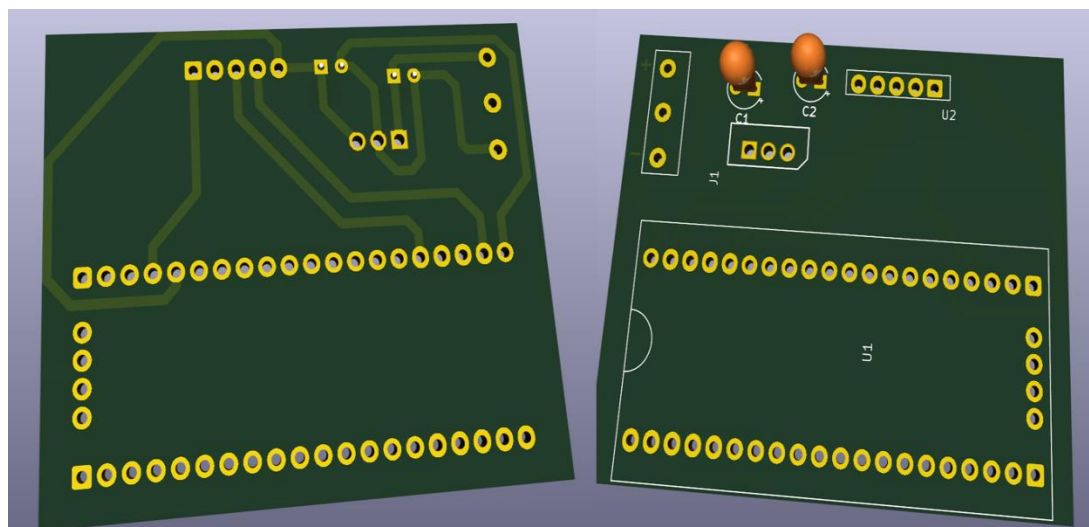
Samples of designed PCB's for the gateway's prototypes
